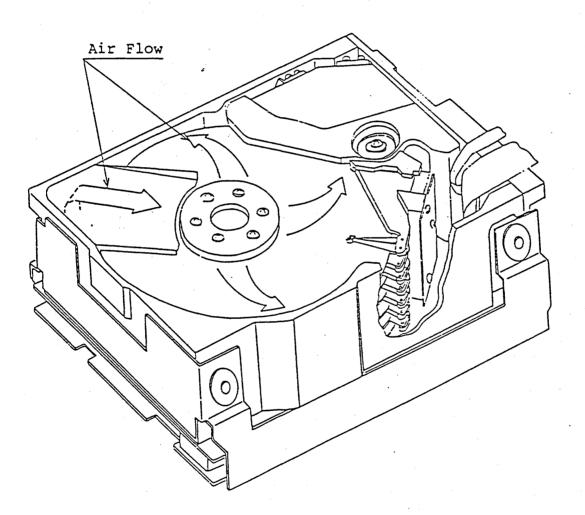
Air Circulation Inside Head and Disk Assembly
